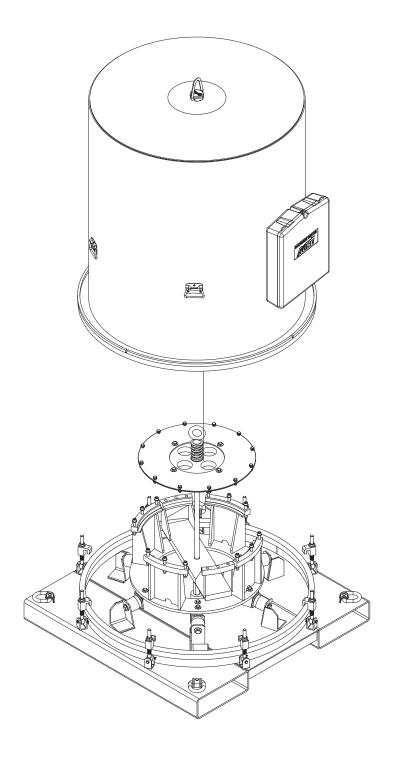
AGSE-C012-G01 Module 2 Container Assembly
